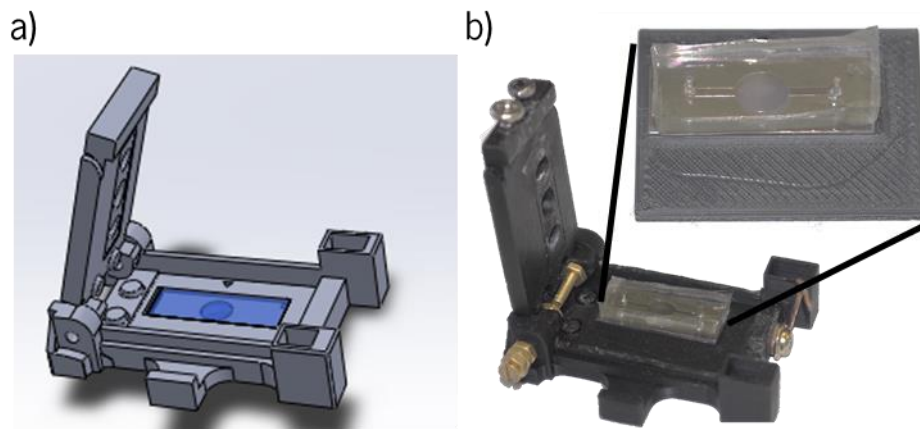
Thin film and microfluidic channel holder: a) 3D CAD drawing; and b) photographs of the system in use.
